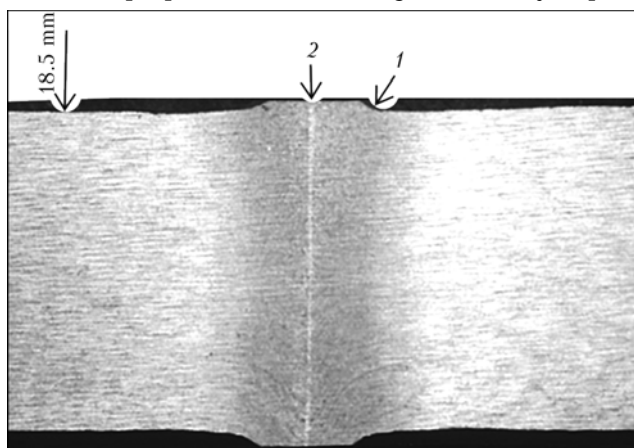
Macrosection of FBW joint: 1 — location of stress concentration caused by shape of the joint; 2 — JZ
